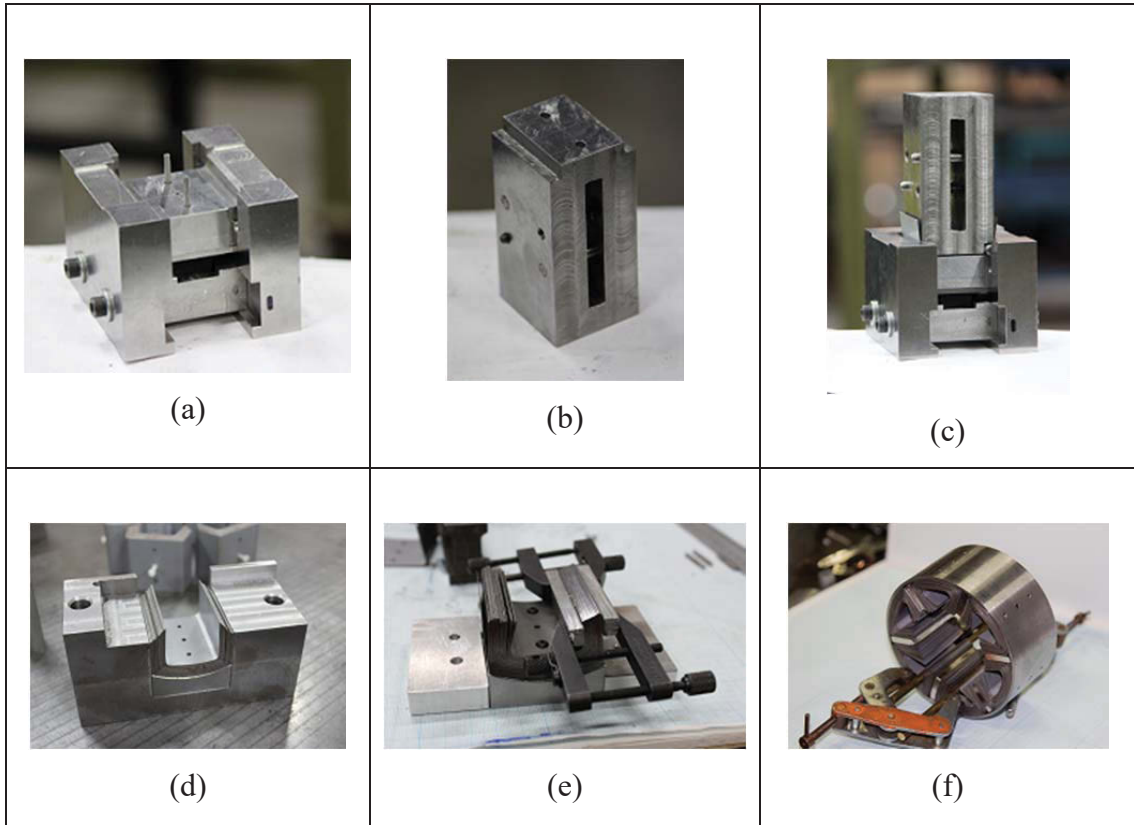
Custom-made tools and methods used in fabrication of ALFSPMM, where (a)-(d) custom-made dies used in pressing the stator and rotor laminations, and (e) and (f) clamps used in squeezing out excess glue and insuring the thickness of the laminations.
